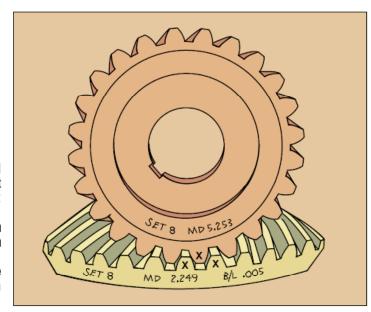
Typical markings on bevel gears include (left to right) the gearset number, mounting distance (MD) in inches for each gear, x's on mating teeth, and the backlash dimension (B/L) in inches.
